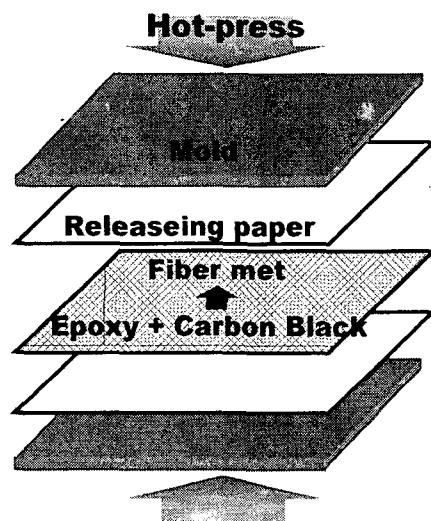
Manufacturing process of electromagnetic interference shielding specimens
